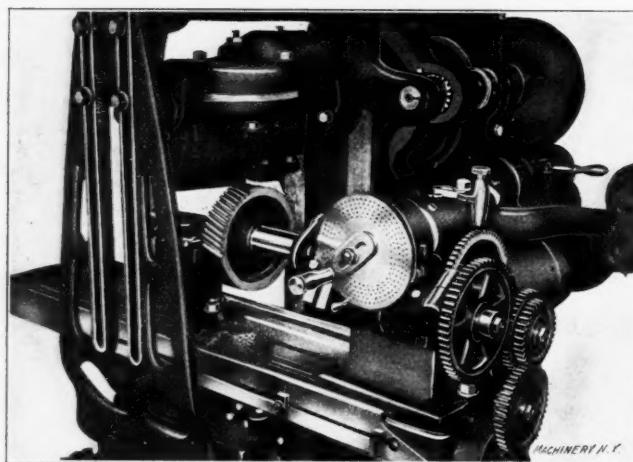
Cutting a Spiral Gear of Large Diameter and Large Lead.
